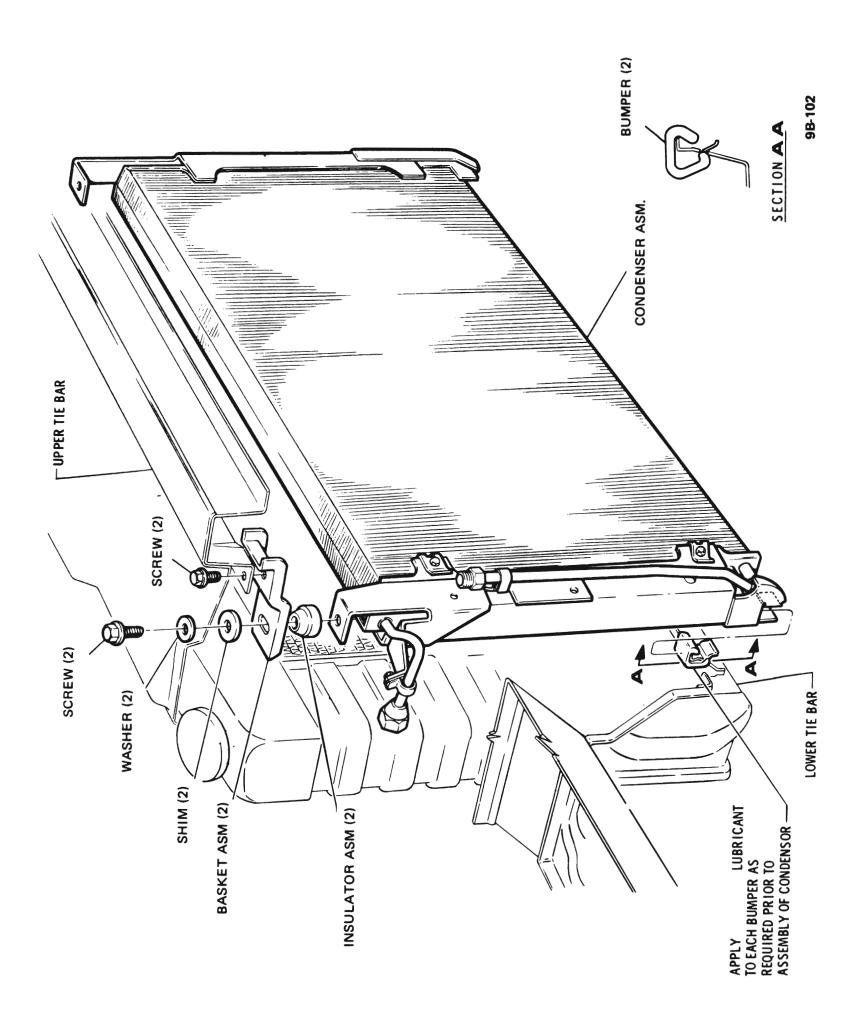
B-118 Condenser Assembly Mounting - B-C-E Series
